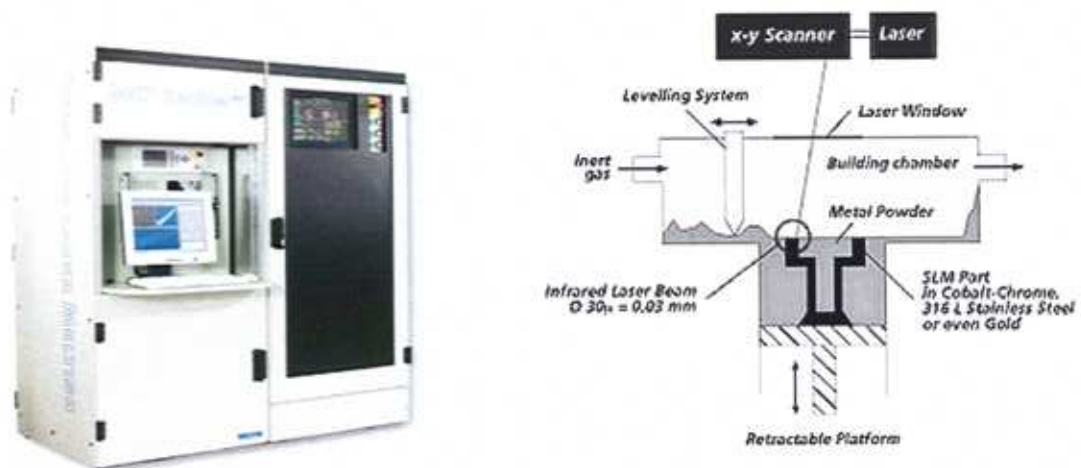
Selective Laser Melting machine and Process²¹
